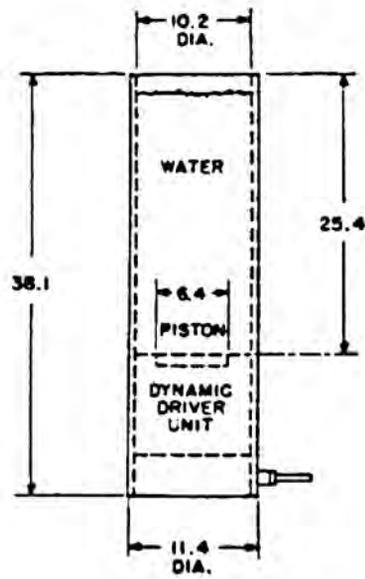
Dimensions (in cm) of Type G19 calibrator.
